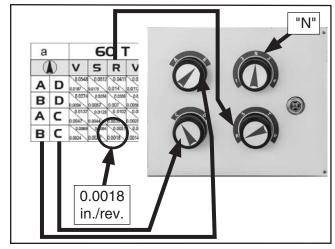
Gearbox dials positioned for 0.0018 in./rev.
